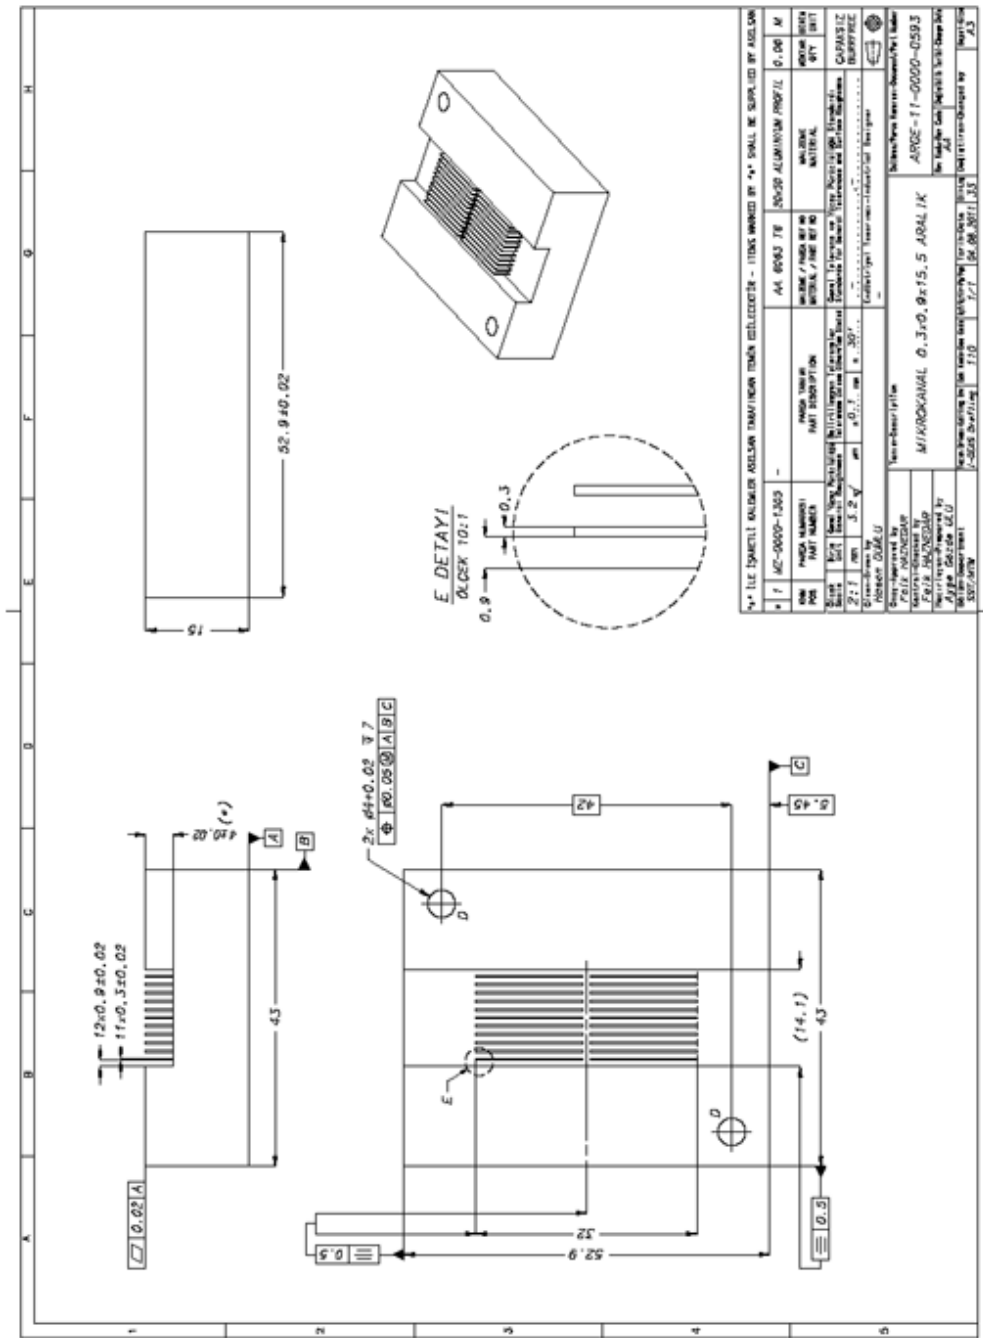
Technical drawings of 900 micron wide singe interrupted channel
